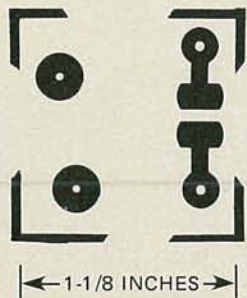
THE FOIL PATTERN for the SHIFT board is shown here full size.
